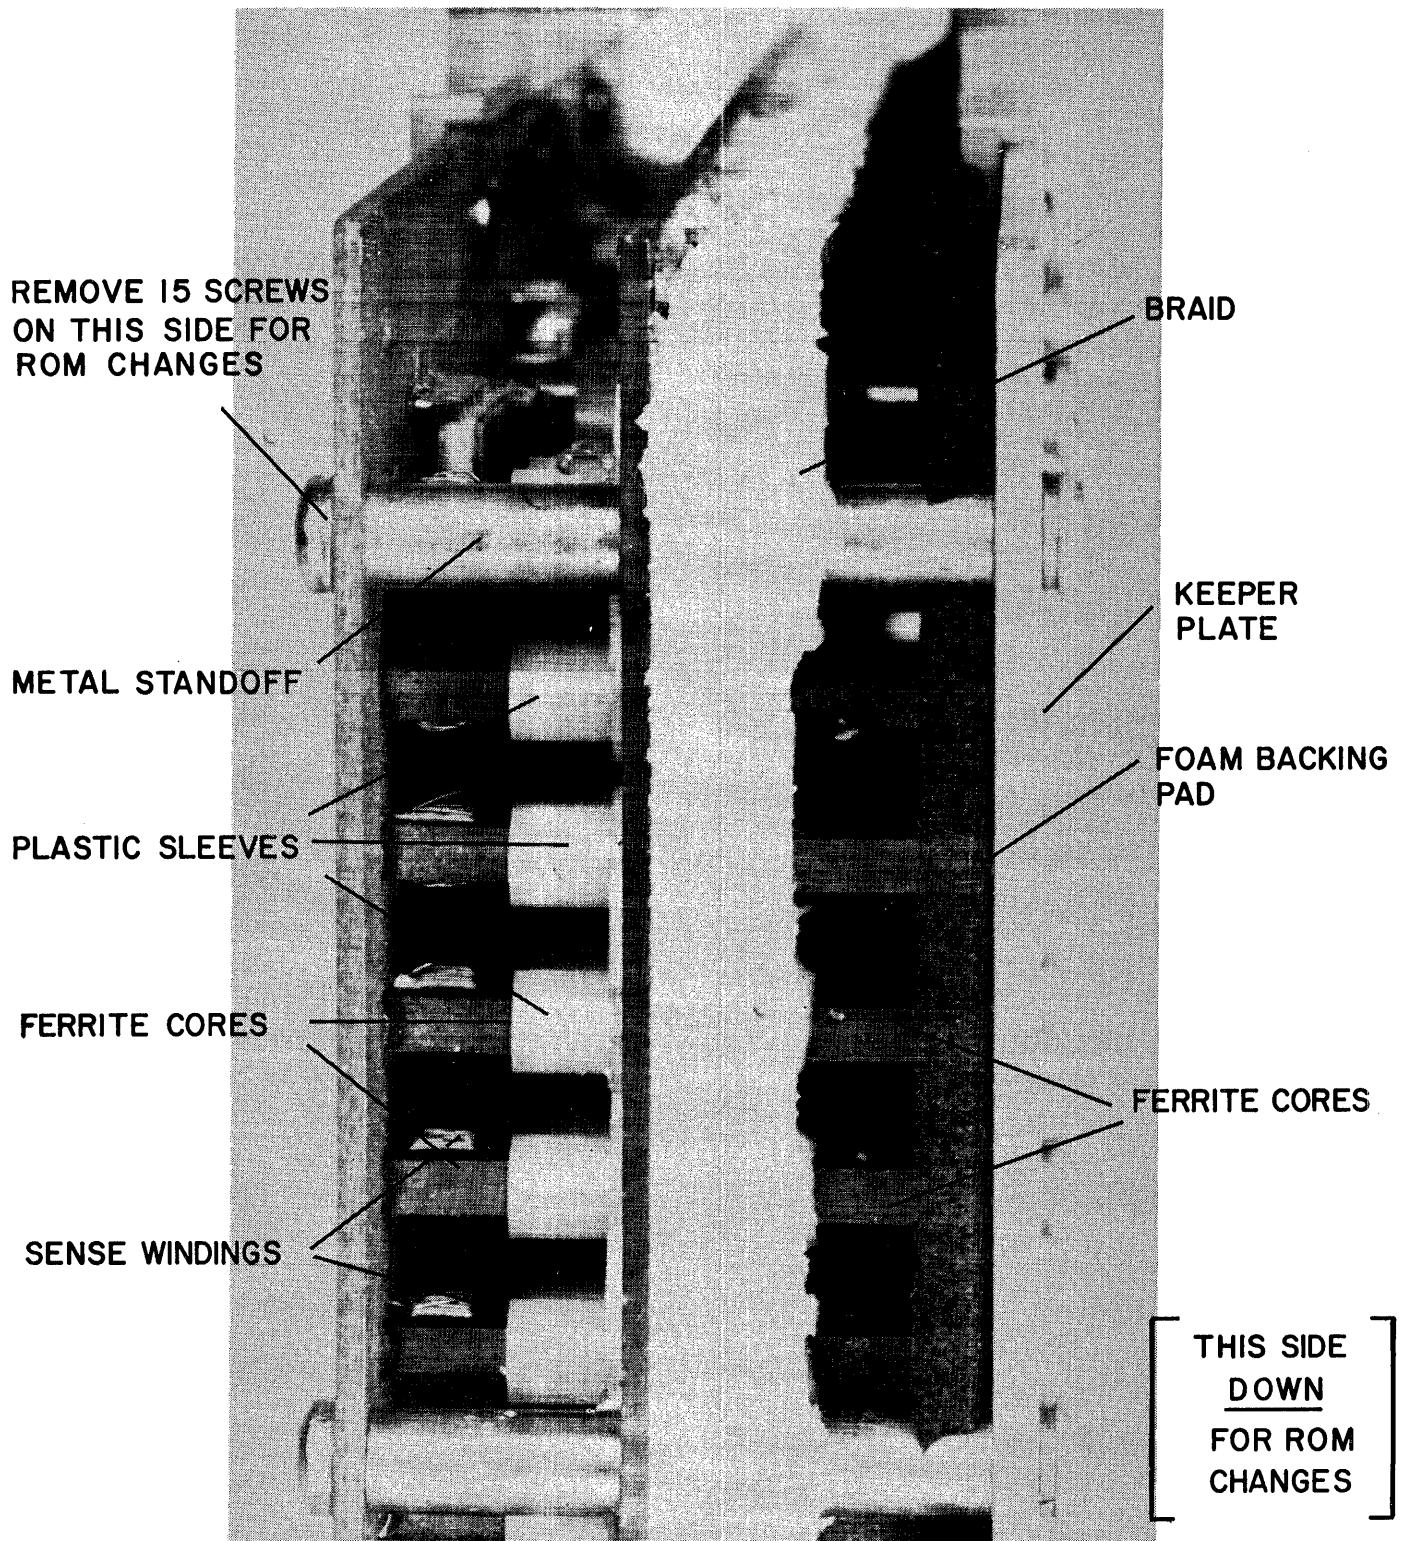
ROM Board Assembly - G922-G923 (Edge View)
